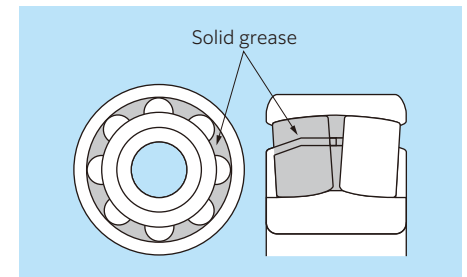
Spherical roller bearing with full-pack solid grease (Available for spherical roller bearings)
